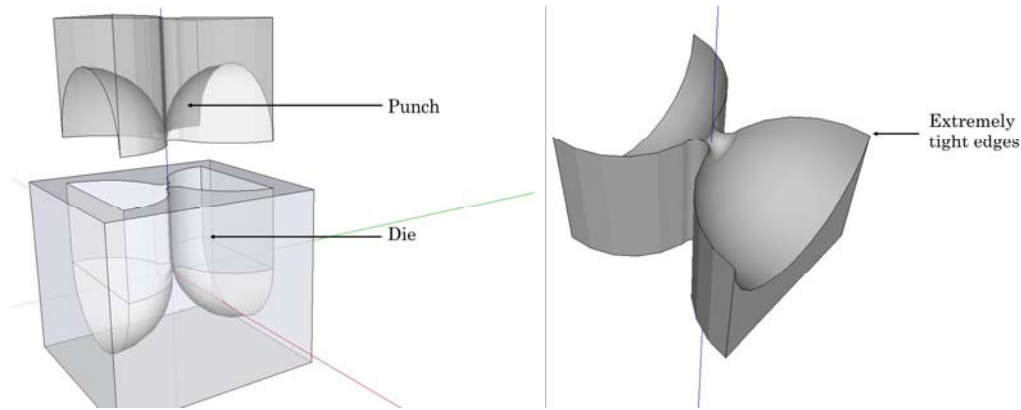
Drawing of an hourglass shape mold alongside and punch
